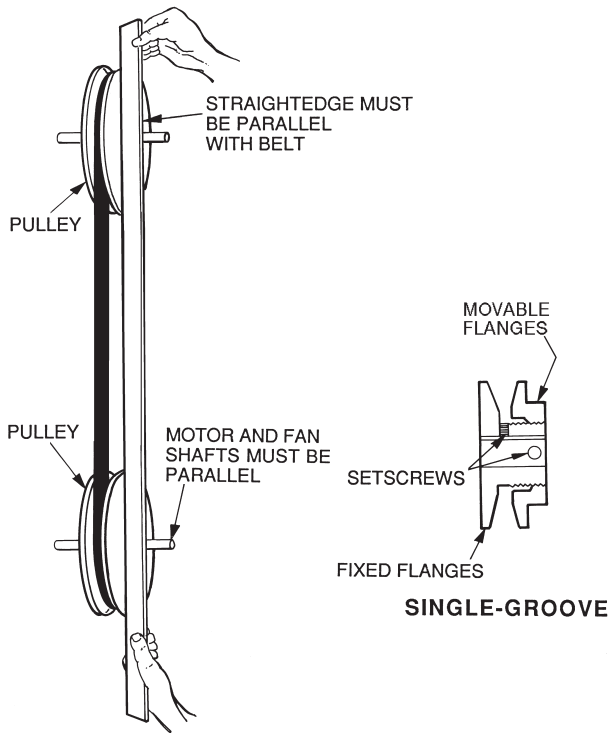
Evaporator-Fan Alignment and Adjustment C08081
